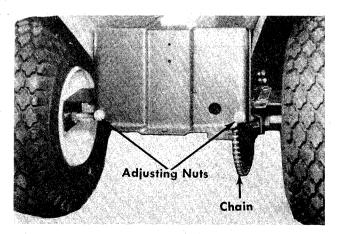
REAR AXLE ASSEMBLY CHAIN ADJUSTMENT
